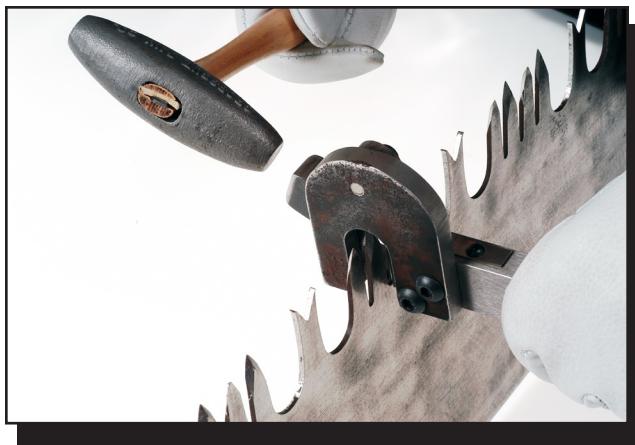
The tooth-set tool is placed on the saw when setting a tooth. Some saw filers prefer the tooth-set tool because it reduces the chance of a glancing blow.
